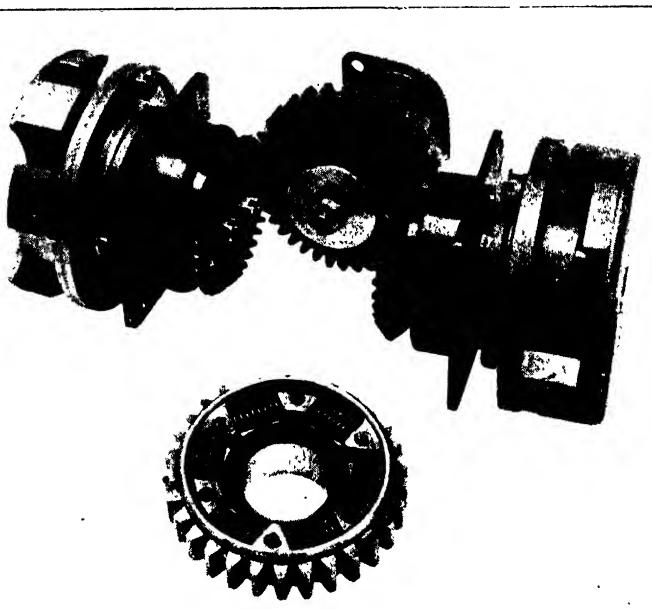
Magneto Driving Gears showing Spring Drive Gear.
